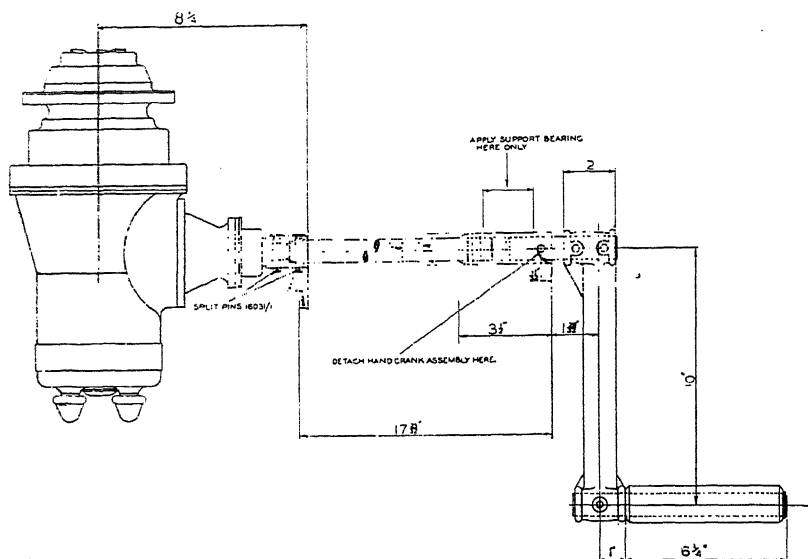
INSTALLATION DIAGRAM FOR HAND-CRANK ASSEMBLY
